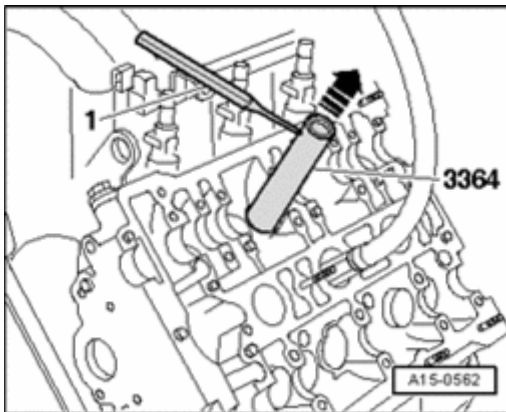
Securing Valve Seal Removal Tool 3364 With Drift Or Cotter Pin Driver
